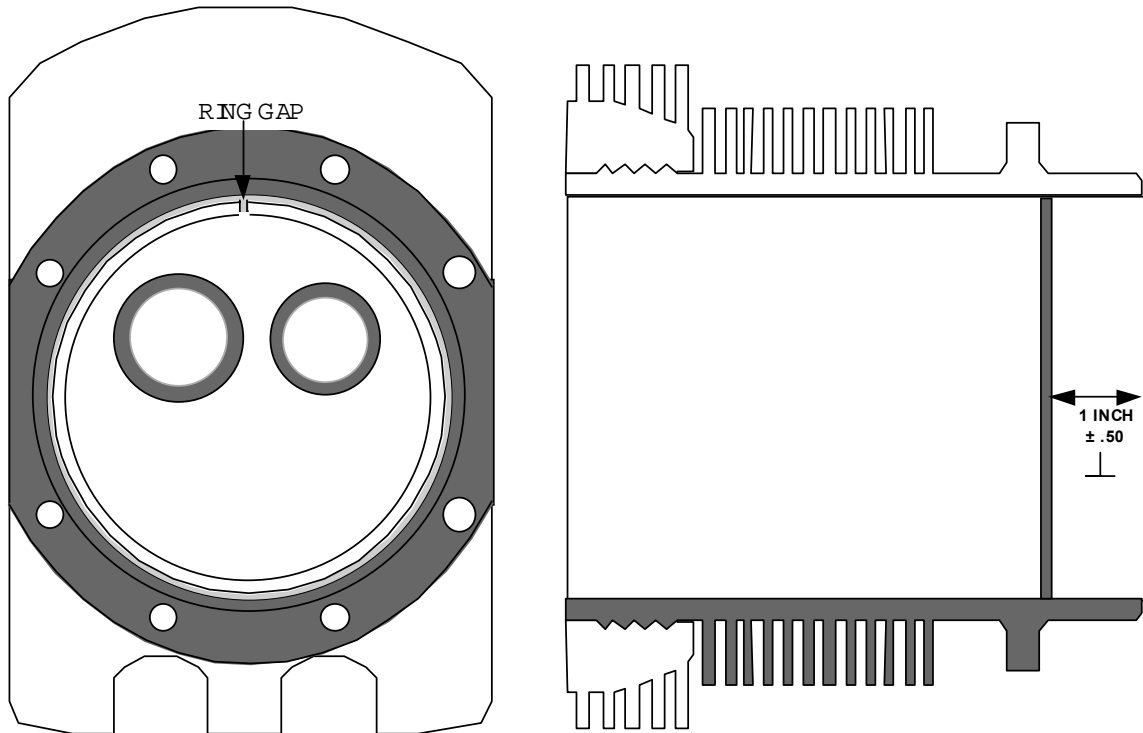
LOCATION FOR INSPECTING RING GAP
